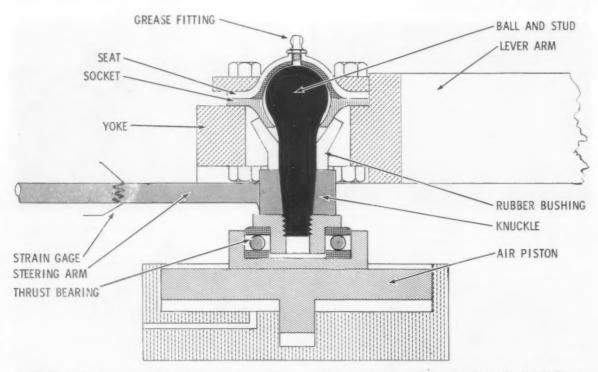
The joint as used in the grease test machine. Load is applied to stud by air piston, forcing ball up.
